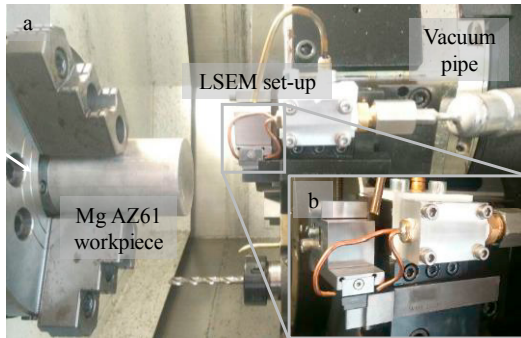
a) Cryogenic LSEM experimental setup mounted on the lathe; b) magnification of the LSEM tools.
